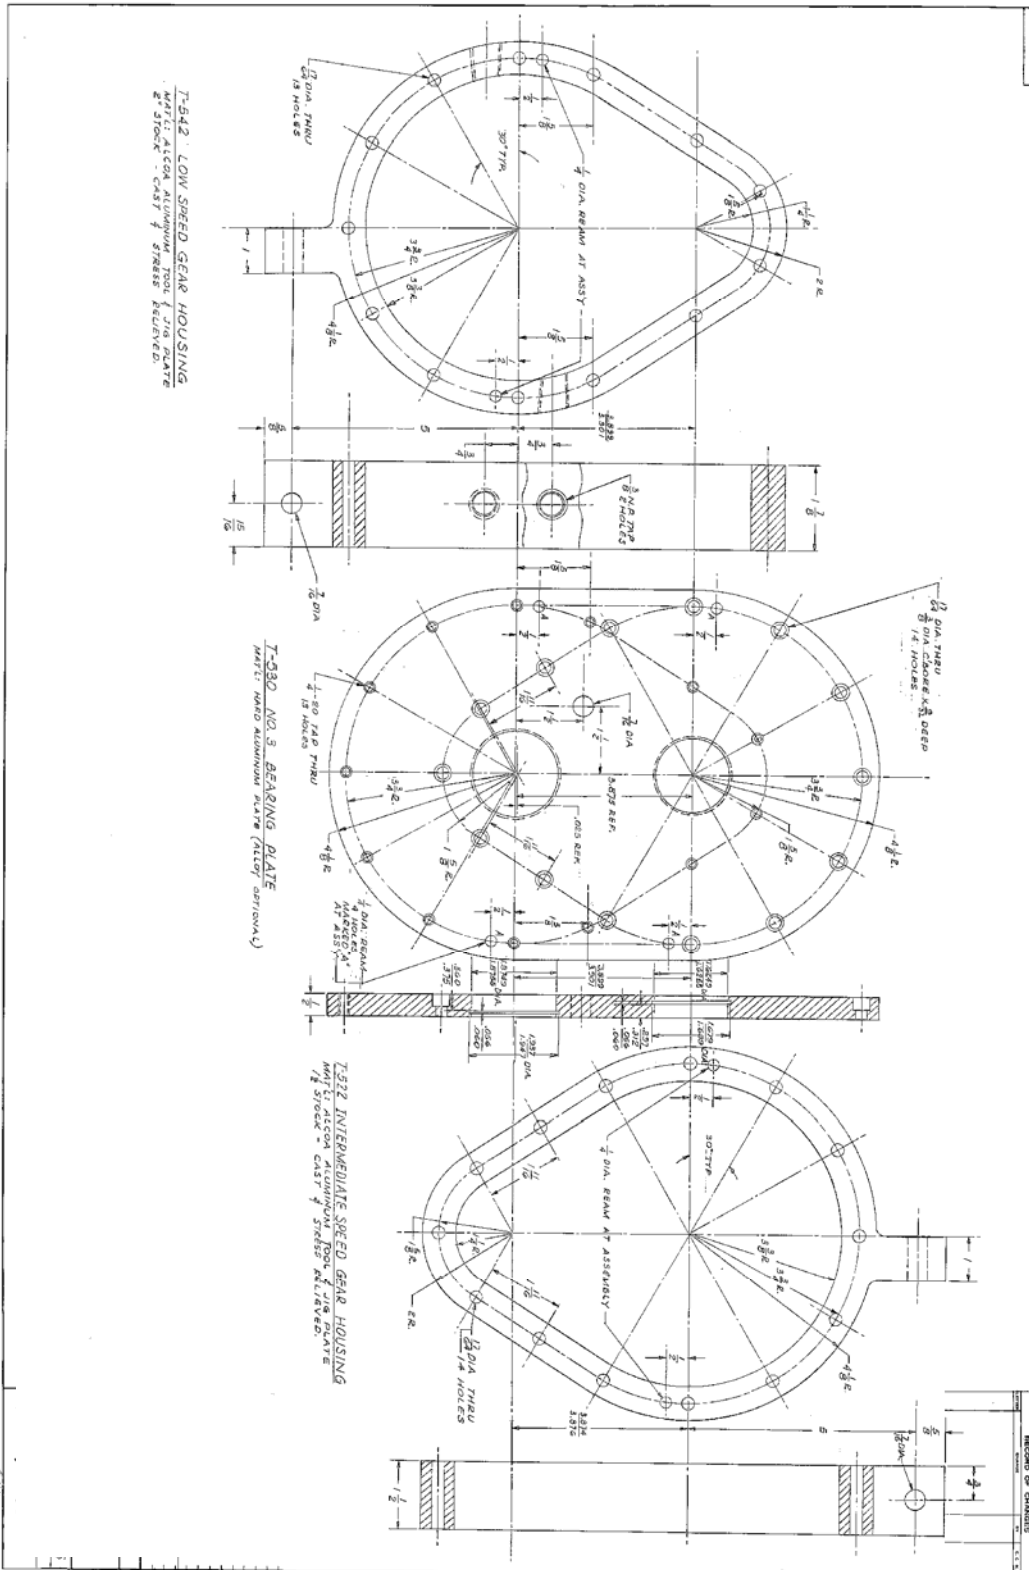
Detailed drawing of bearing plate three, low speed gear housing, and intermediate speed gear housing.
